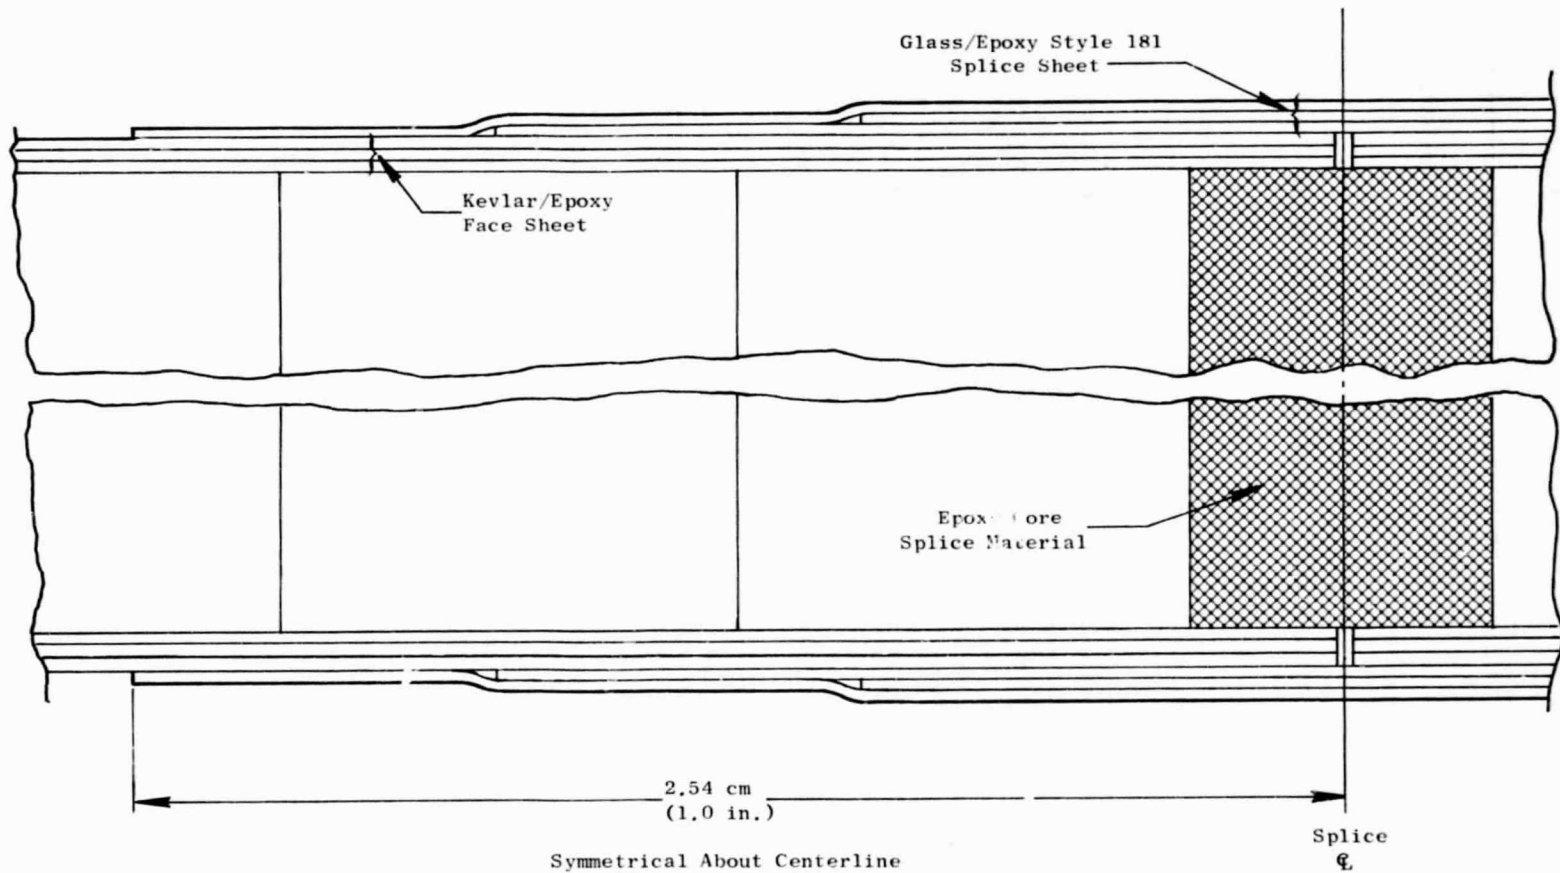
Inlet Manufacturing Joint Splice Test Specimen.
